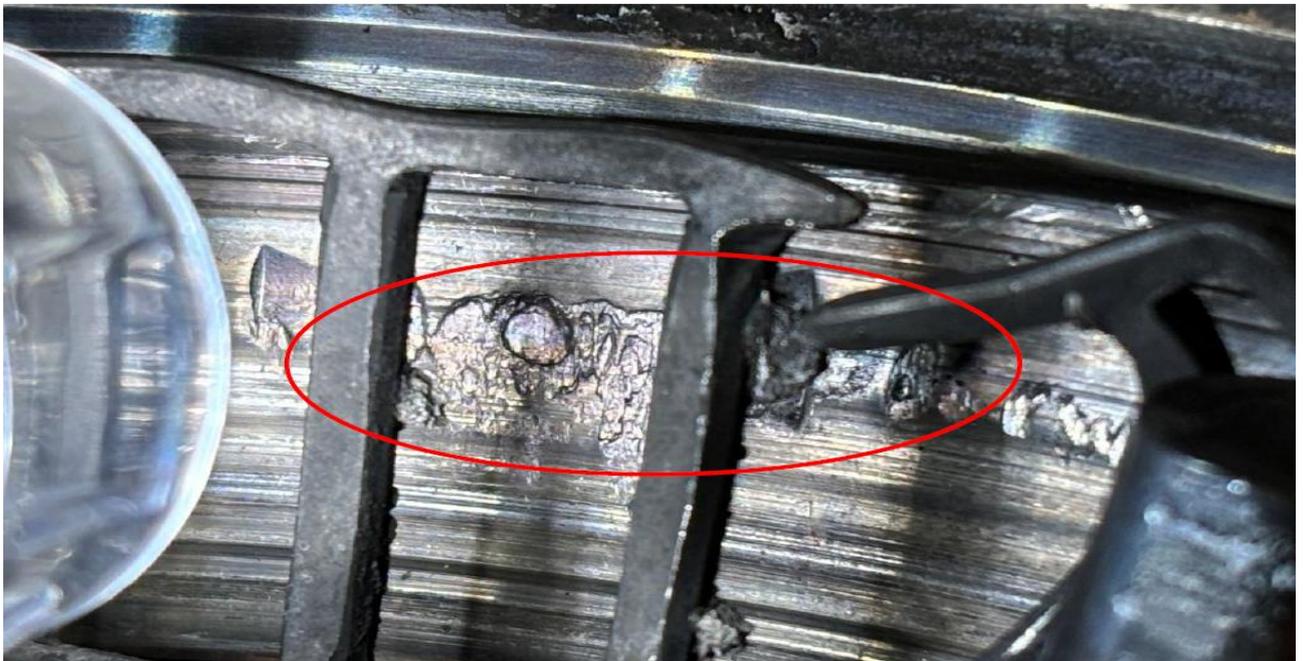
The red oval shape highlights the spalled area in greater detail.
